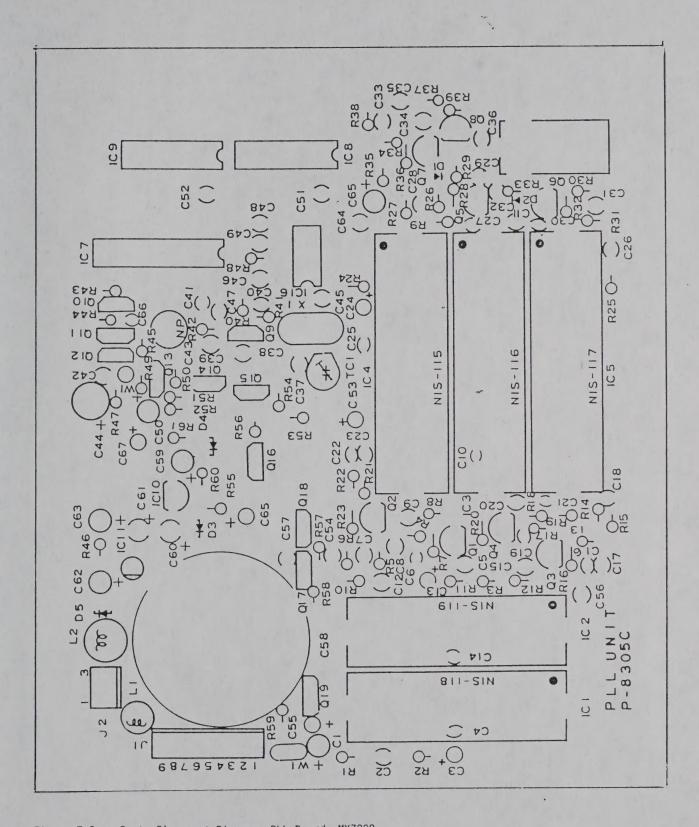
Parts Placement Diagram, PLL Board, MX7000
